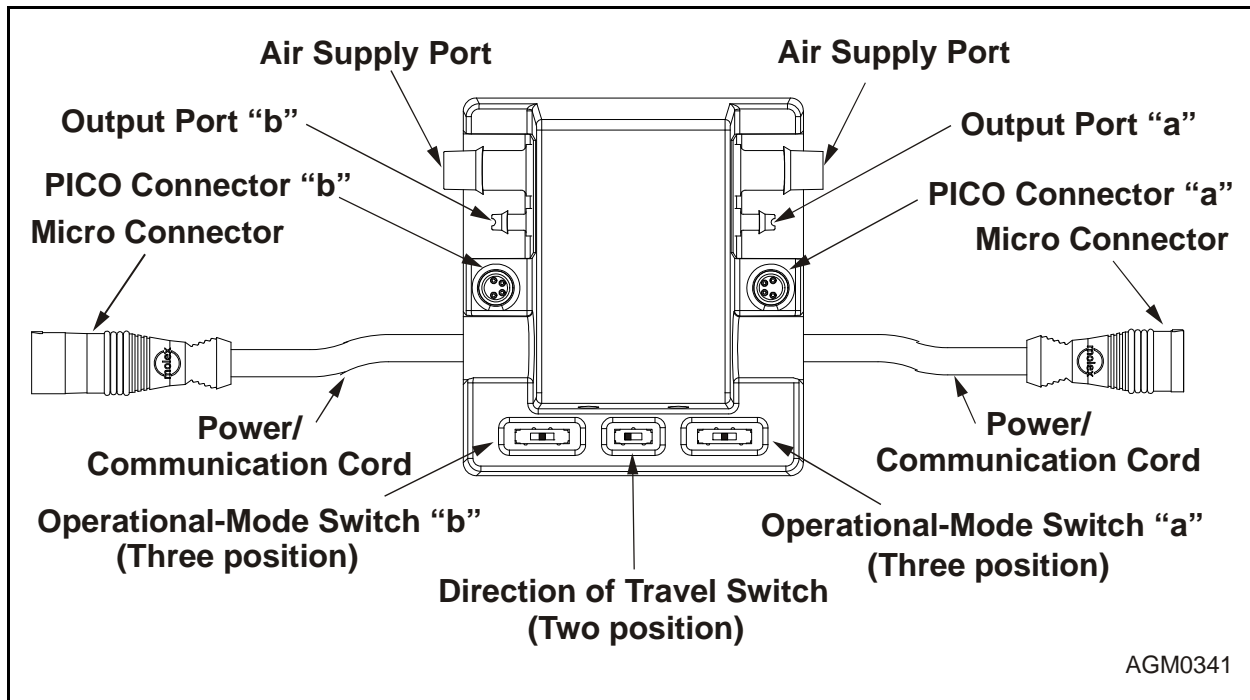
14 Solenoid Control Module (SCM) Switch Locations
